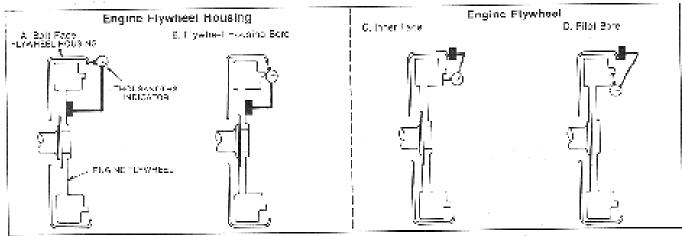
Dial Indicating Flywhool Housing and Engine Flywheal
